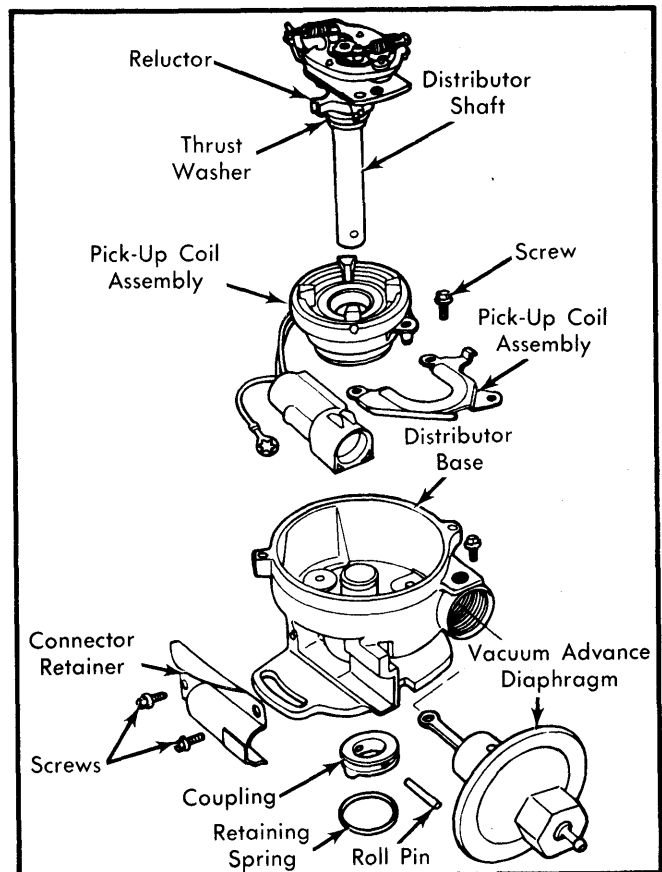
Exploded View of Dura-Spark Distributor for Front Wheel Drive Models w/Man. Trans.
